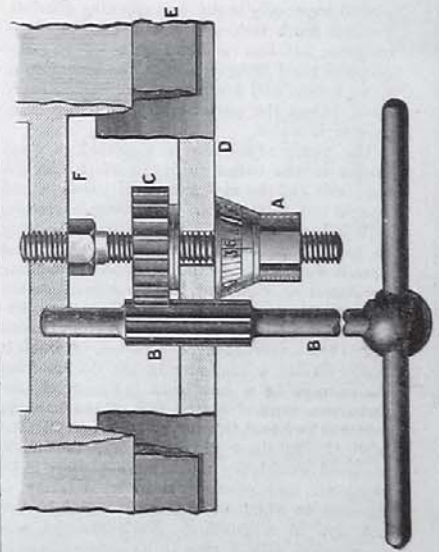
PLAN AND PART SECTION OF FIG. 3.
